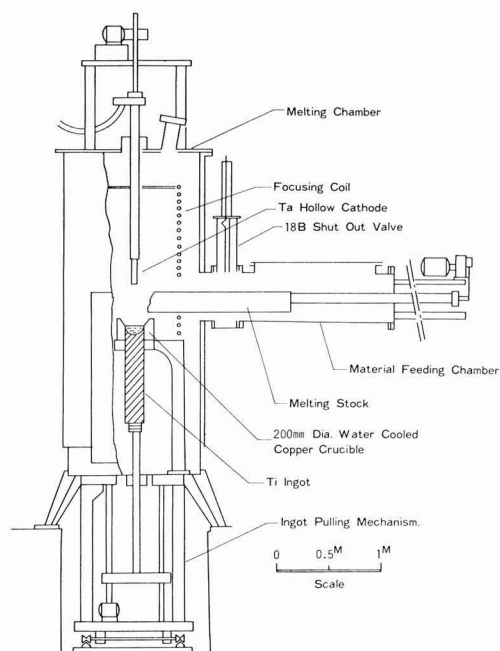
Schematic drawing of VPEB one-step recycle furnace
